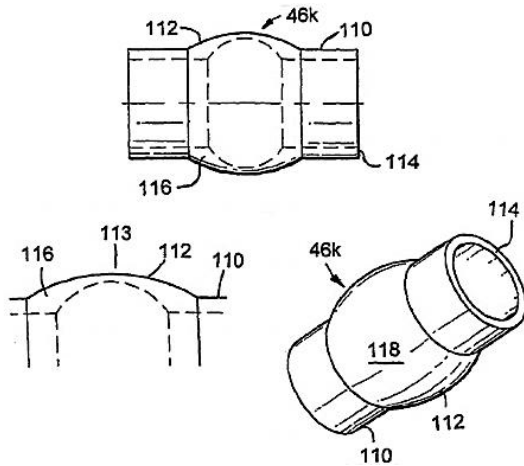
Alternative Design of Seal Element in Un-Deformed Position
